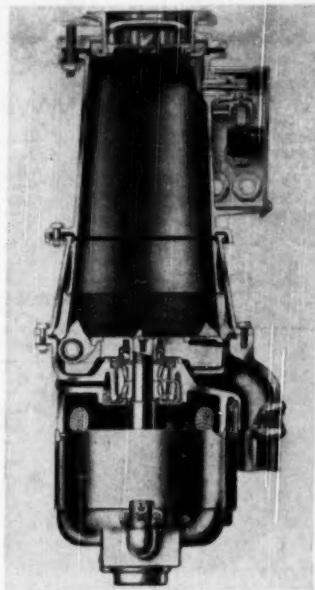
MOTOR, GRINDING HEAD, AND HOPPER ASSEMBLY FOR GARBAGE-DISPOSAL UNIT
